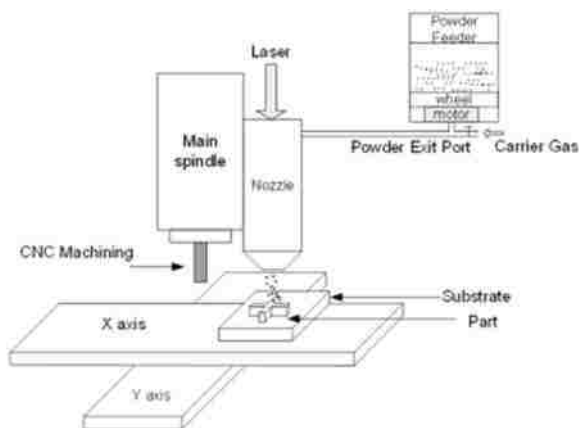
A hybrid manufacturing system: laser deposition for material deposition and CNC milling for material removal
